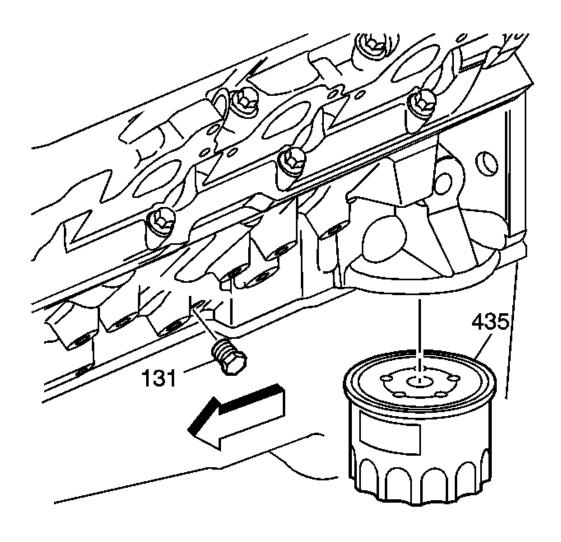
View Of Oil Filter & Left Side Engine Block Coolant Drain Hole Plug Courtesy of GENERAL MOTORS CORP.
